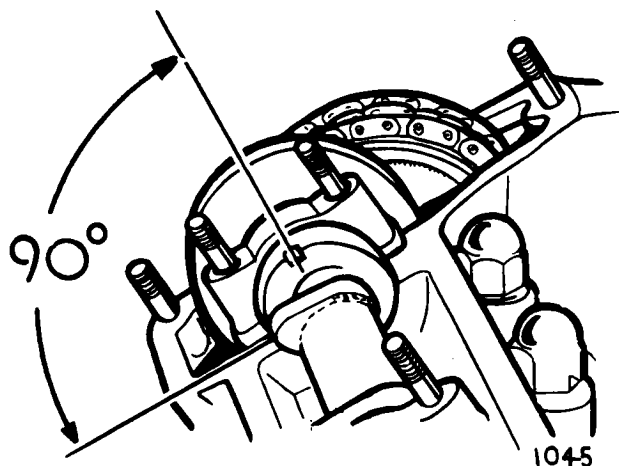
When fitting a camshaft the keyway must be at 90° to the camshaft cover face.
